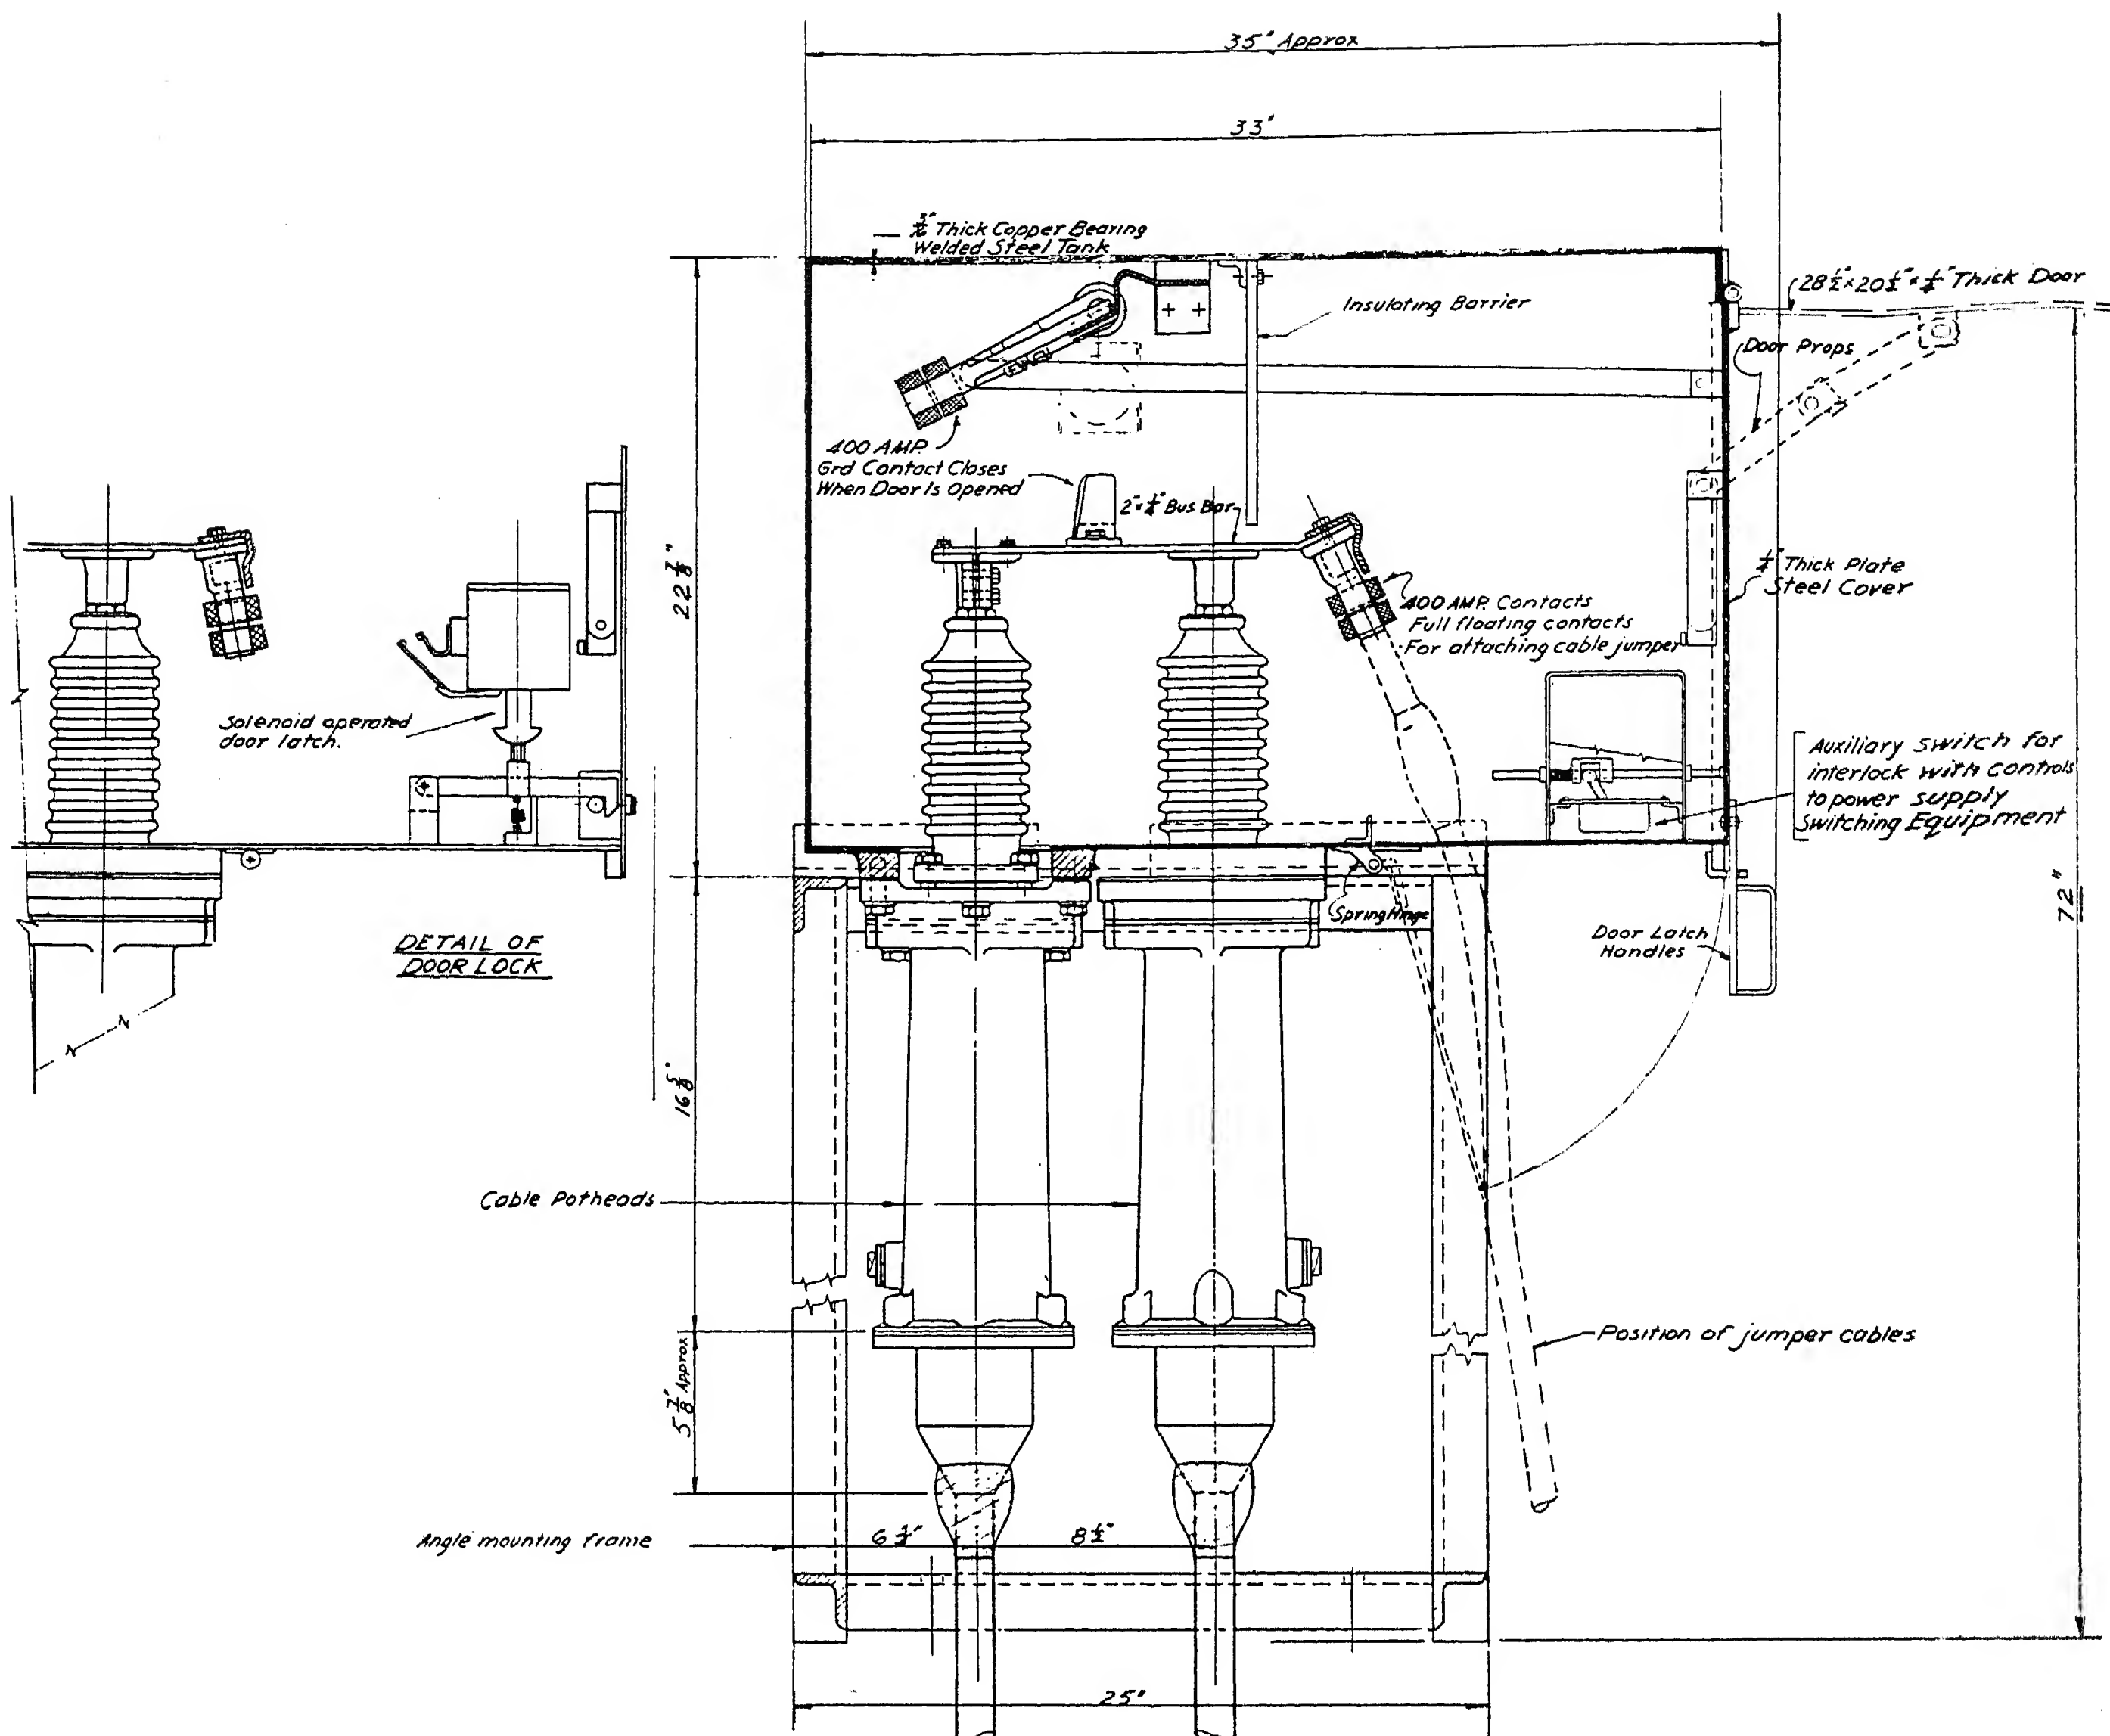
Construction details of safety connection box for sleet-thawing cable jumpers (scale:  $\frac{3}{8}$ " = 1'-0")
